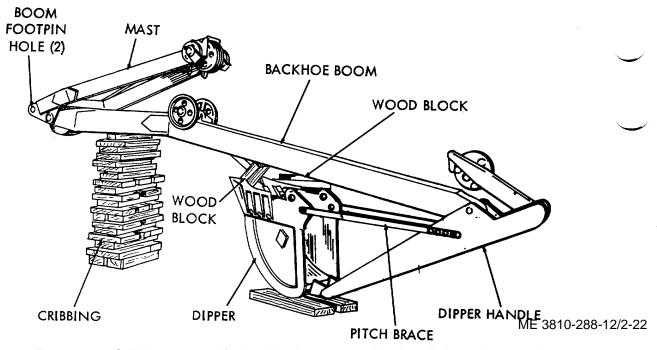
Cribbing prepared for backhoe boom assembly. installation and removal.
